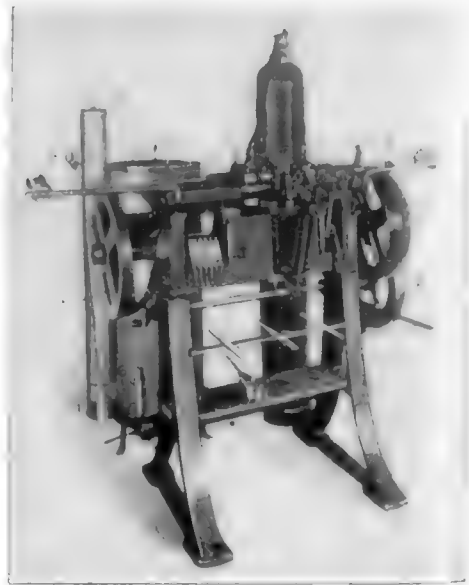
Automatic Machine for welding Lead-in Wires
